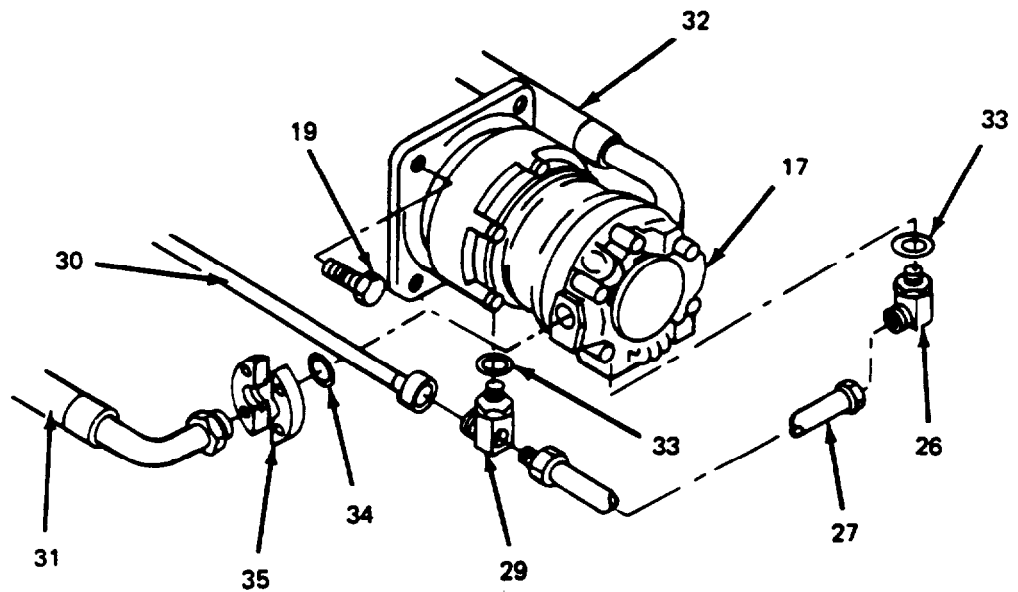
Remove/Install Hydraulic Motor (Sheet 1 of 2).
